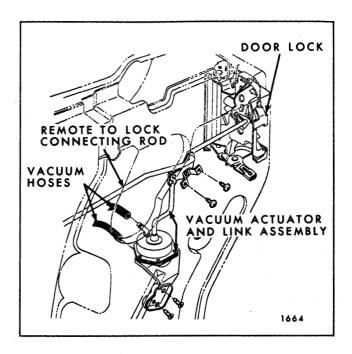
Rear Door Vacuum Lock Actuator and Link Assembly - 68069-68169 Styles
